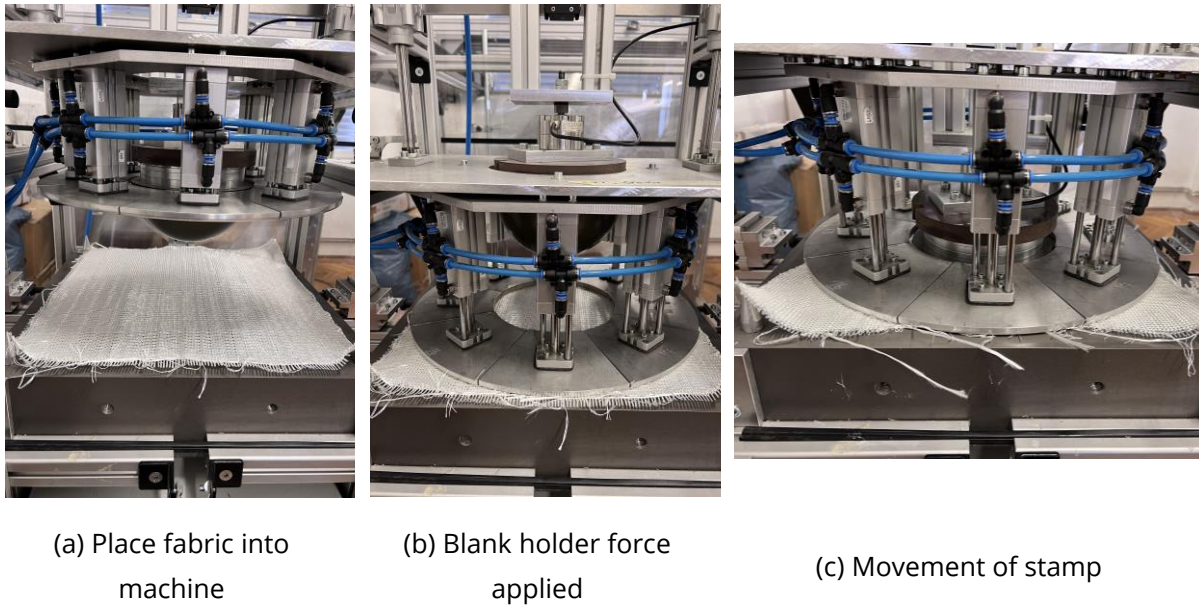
Forming of BWKF GF 2-layer with hemisphere draping machine with blank holder
